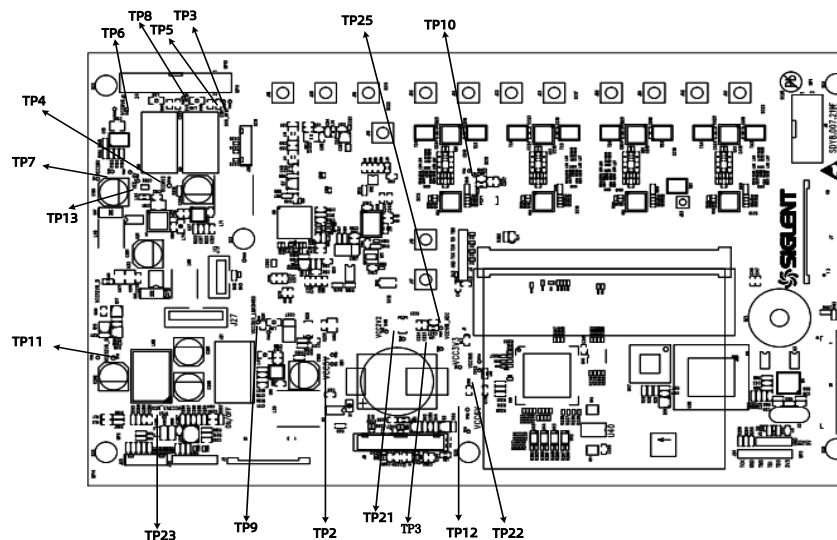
A1 Mb Board power supply LED indicators and measurement points
